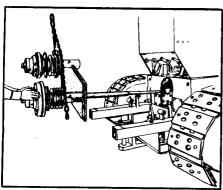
Removing Power Take-Off DISASSEMBLY OF CONE ASSEMBLY
